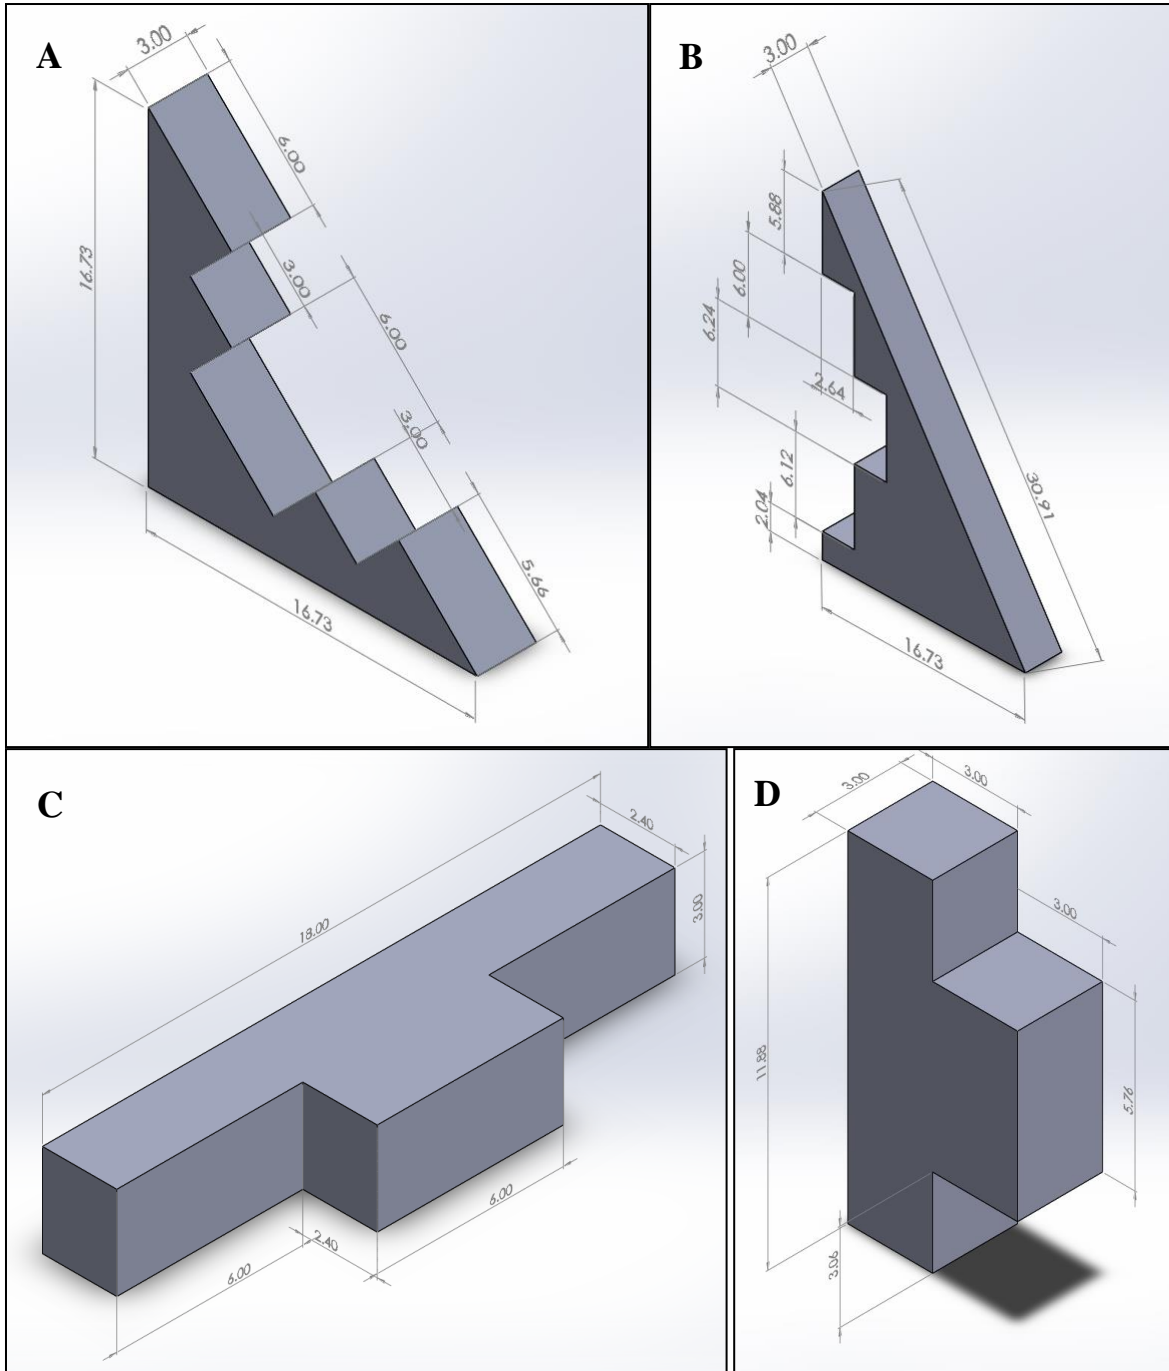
Zoomed in pictures of the SolidWorks drawing showing the dimensions of the parts.
